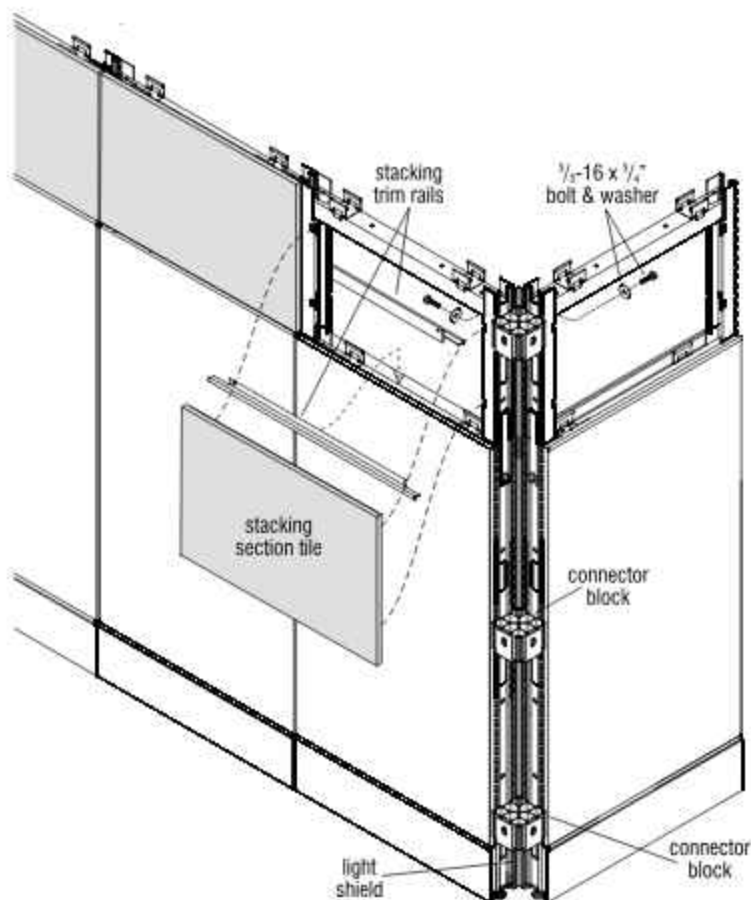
Stacking Frames with Fabric, Markerboard or Slat Wall Tiles (steel frame) - Tile Assembly
